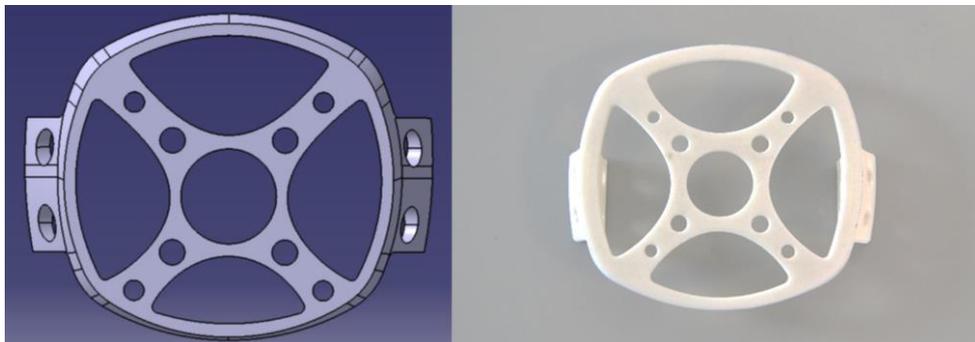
Final motor mount. Left, CAD design; right, real assembly
